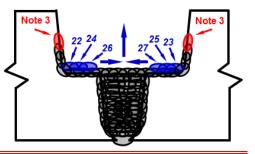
Schematic of the Controlled Fill Welding Procedure for Grade 91 Steel for a Full Penetration Weld repair Using a Step Weld Preparation.
